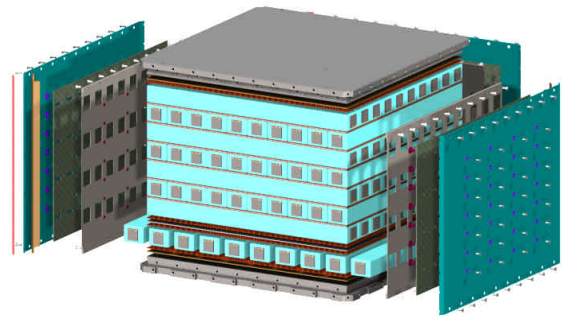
Beam Test Hodoscopic Calorimeter Design. Eight layers of 10 CsI crystals are held in a compression cell and read out by PIN photodiodes. This expanded view shows the printed circuit cards for the readout electronics and closeout shields on the side.
